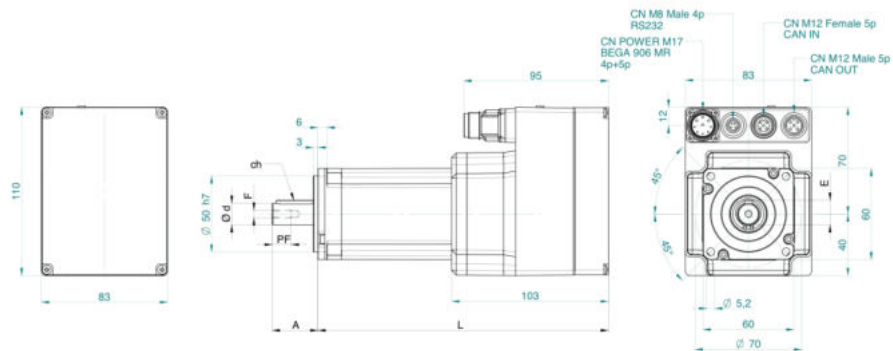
MotorPower - Duet FLexi 80 2.0 Dimensions
